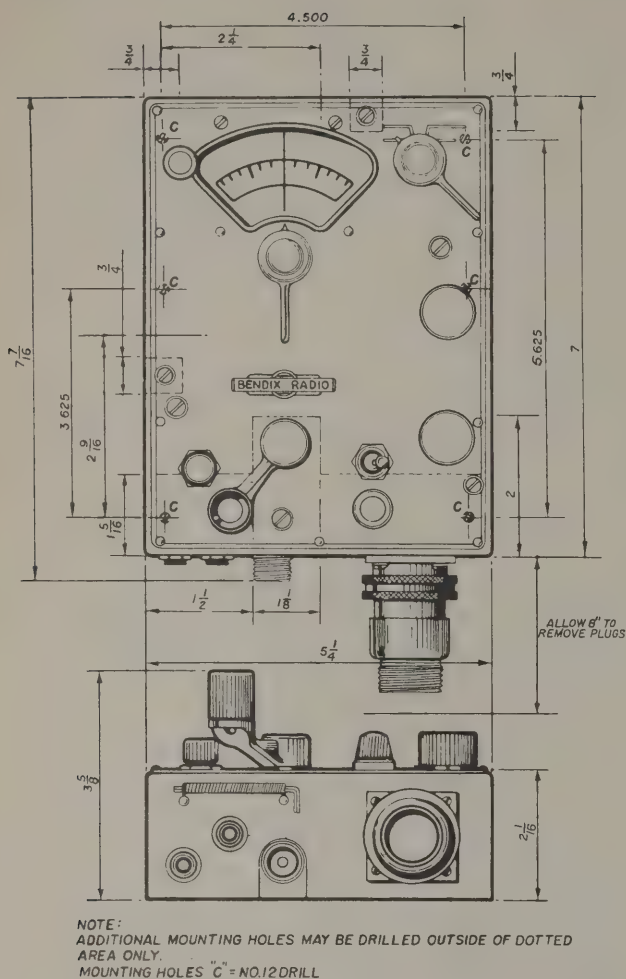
Type MN-28 Remote Control, Outline and Mounting Dimensions
